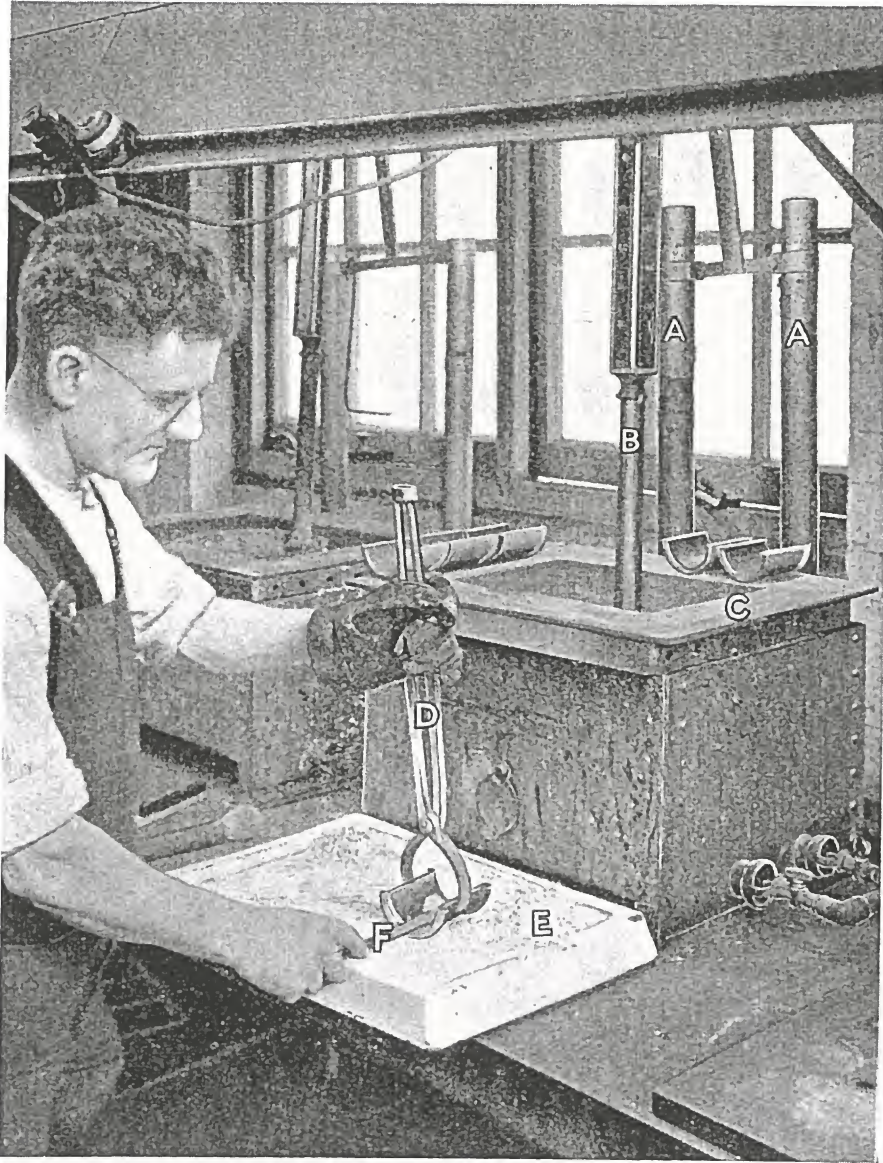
PLATE VA. TINNING A BEARING SHELL PRIOR TO POURING THE BEARING METAL
